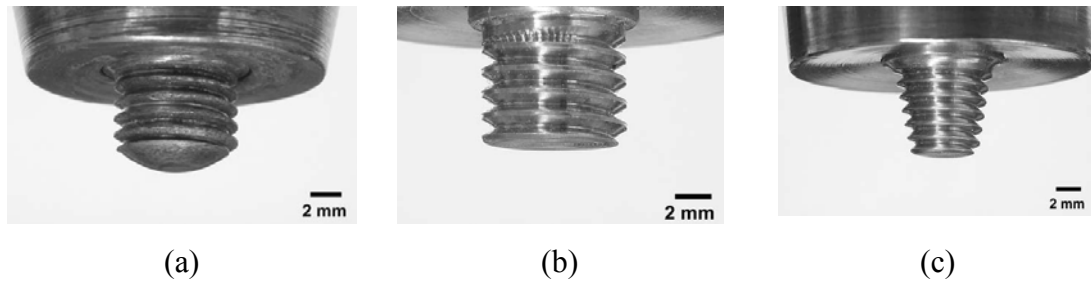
Commonly used tool pin designs (a) round bottom, (b) flat bottom, (c) truncated cone [12]
